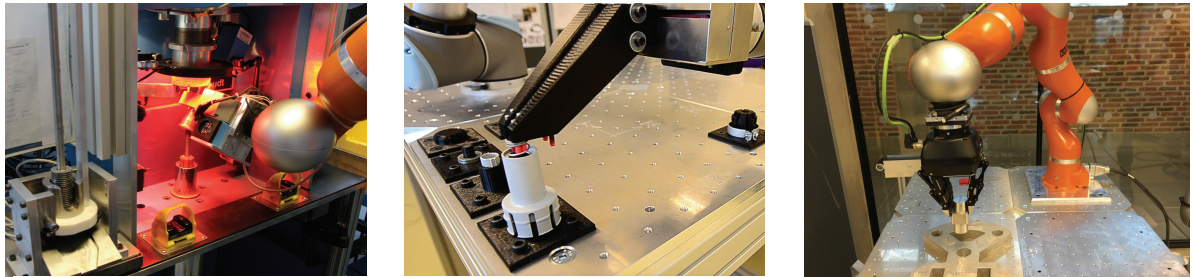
Tasks used in the preliminary assessment of the configuration framework. Left: The assembly of a rotor from 10 metal components. Middle: The assembly of a spring-loaded plastic socket from four components. Right: Part assembly of the Cranfield benchmark [19].
